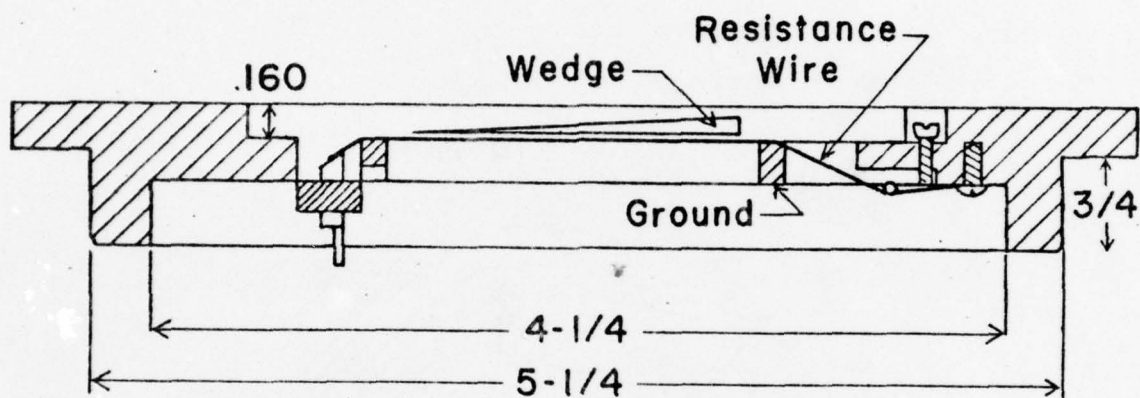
Cross-section of target assembly, all dimensions are in inches.
